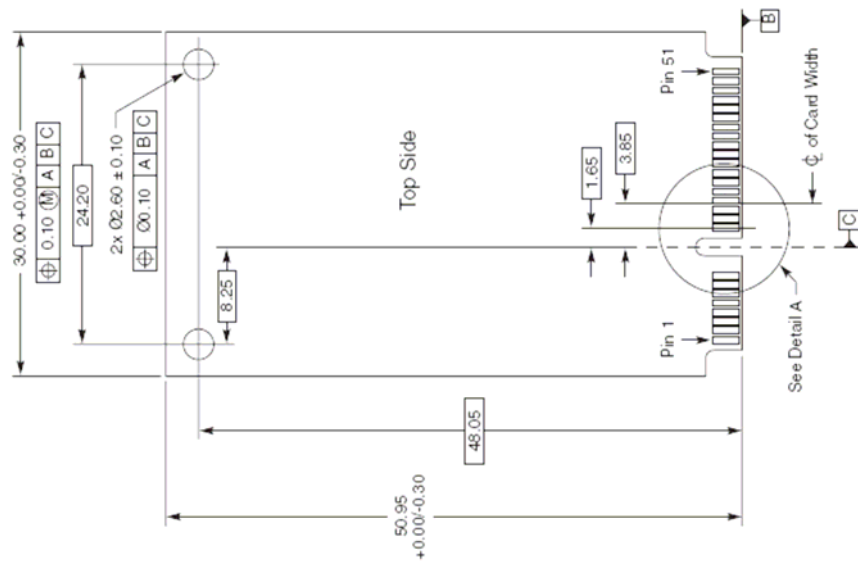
Mini Card Top Side Dimensions (Refer to [www.pcisig.com](http://www.pcisig.com))
